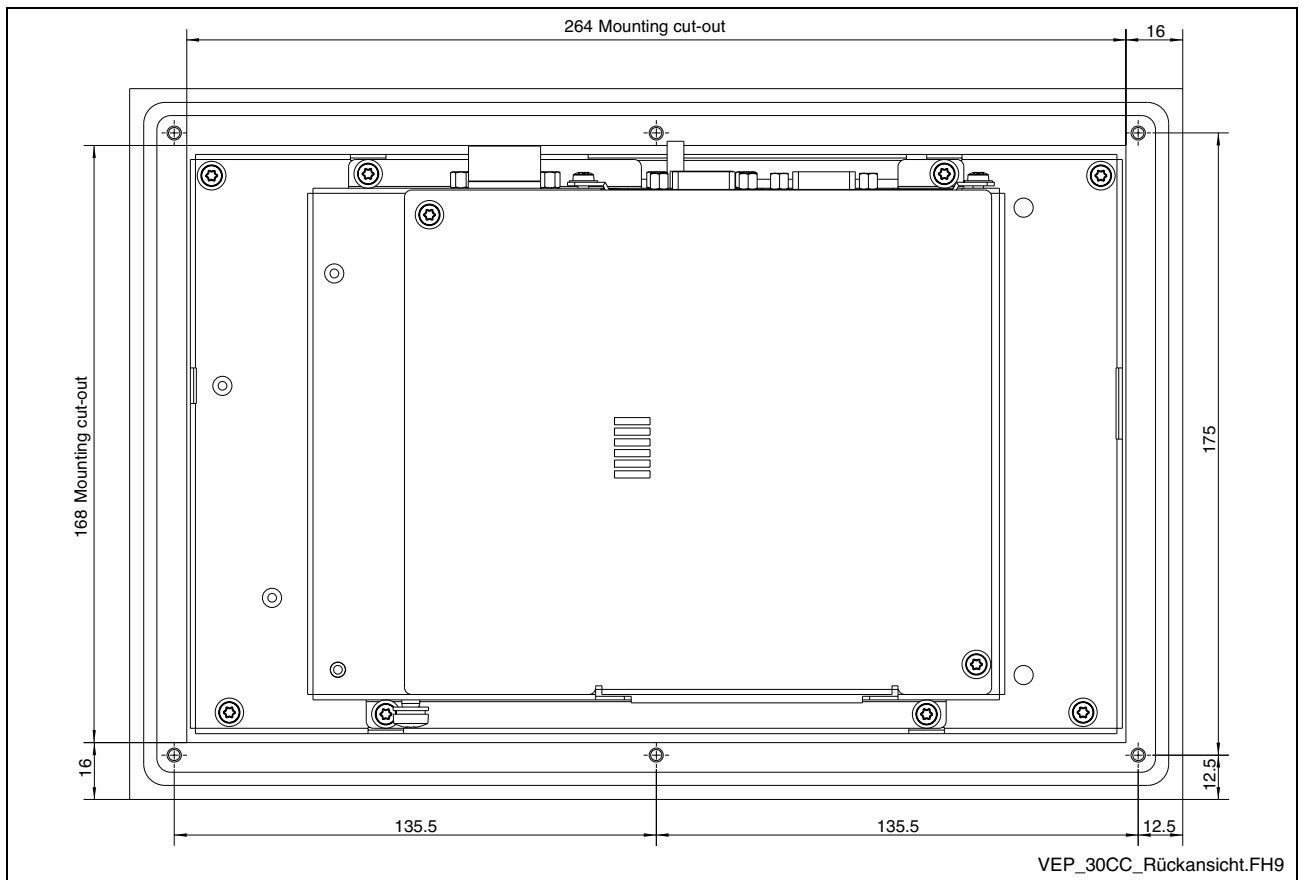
Mounting dimensions of the IndraControl VEP 30.1CC
